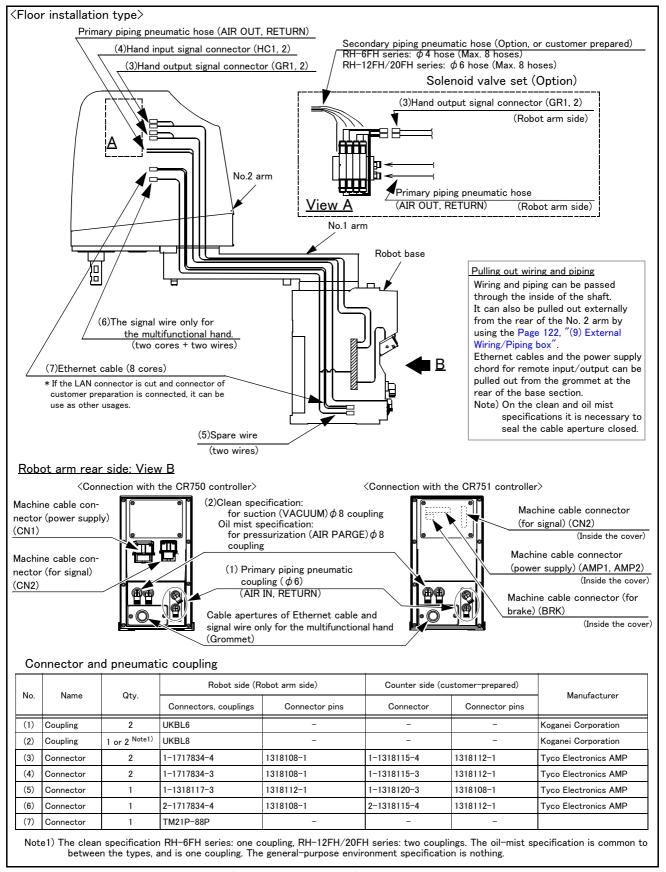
Wiring and piping for hand (Floor installation type)
